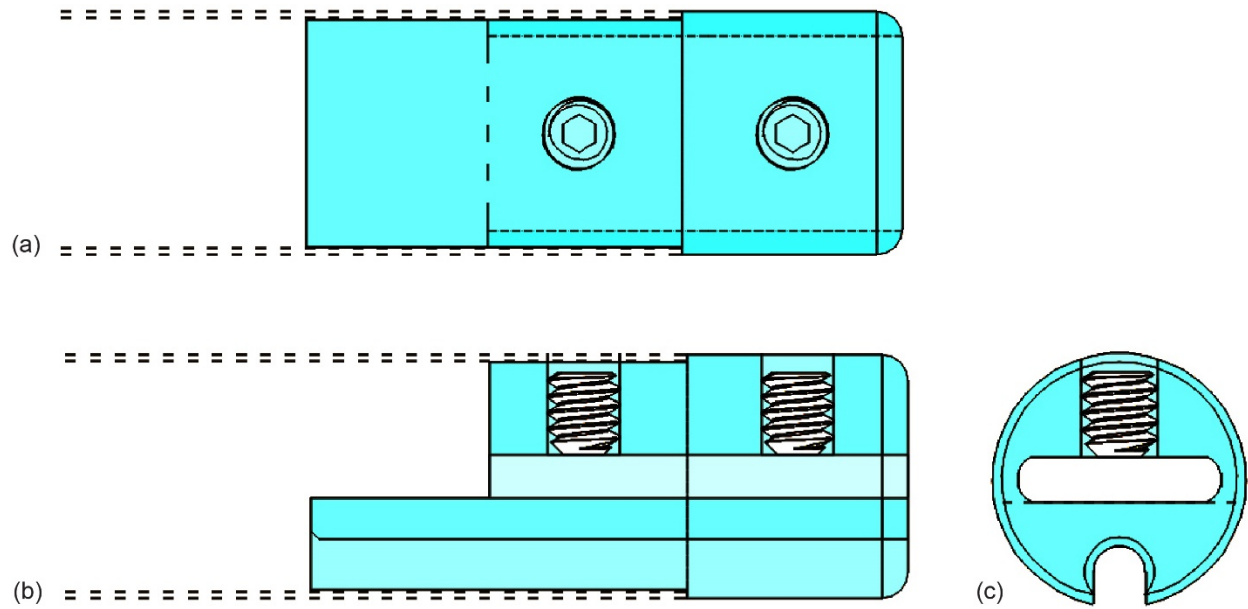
Cantilever mount design attaching to end of ¼-in.-outer-diameter stainless steel tube. Cantilever is inserted into slot in center held in place with spacers and set screws. Thermocouple sits in notch at bottom of (c). (a) Top view. (b) Side view. (c) End view.
